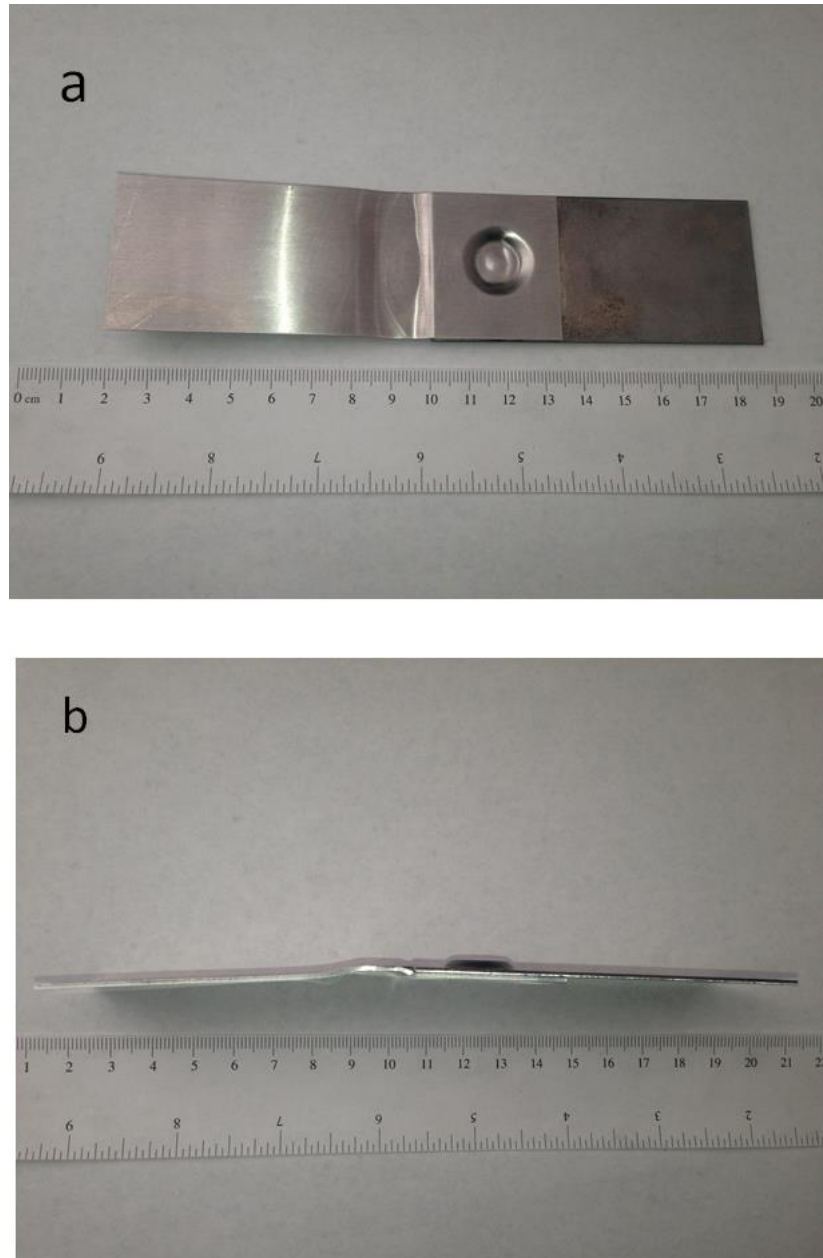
Rear view (a) and side view (b) of a weld created using parameter combination 6
